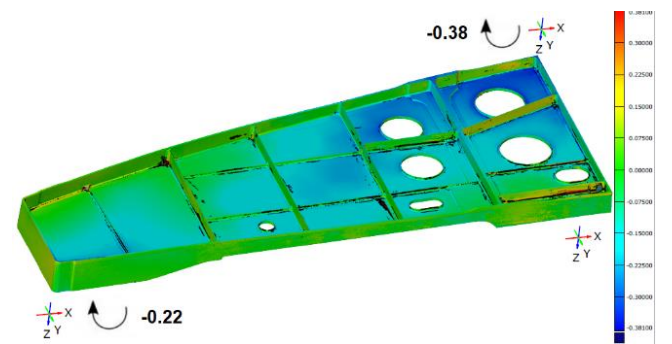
The deformation of a thin-walled element caused during machining on a five-axis machine tool CNC measured in external points
